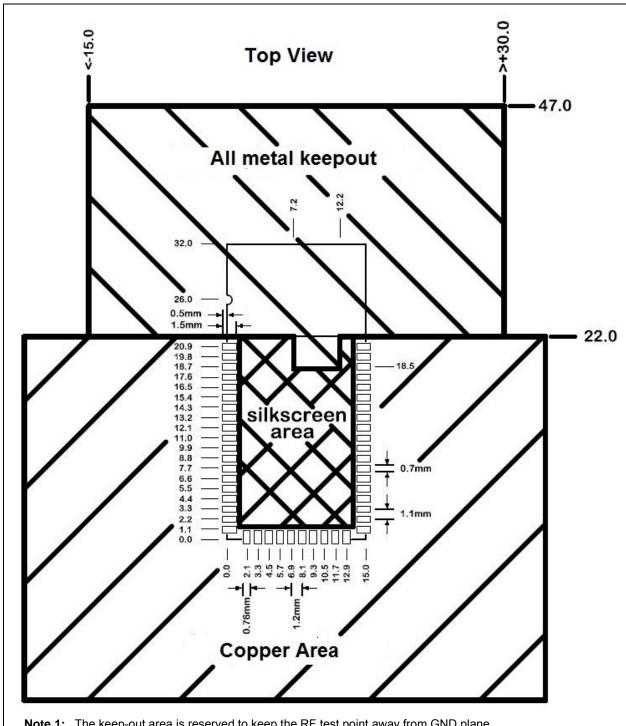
illustrates the recommended PCB footprint of the BM63 module
